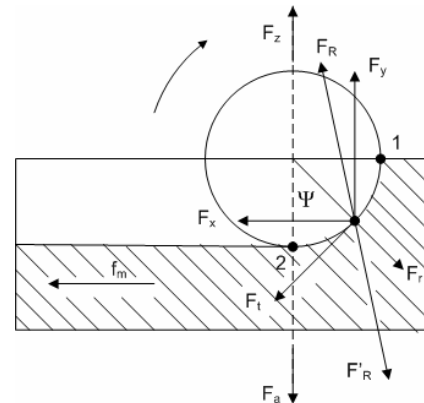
Cutting Force Components Acting on One Tooth of an End Mill Cutter (Down Milling).
